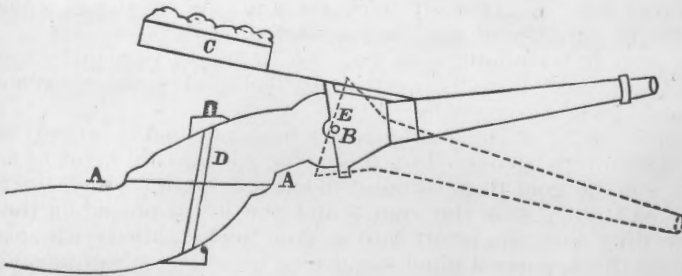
Little Giant, section. A, joint for horizontal motion; B, ditto for depression or elevation; C, balance-box to keep pipe in place; D, E, bolts. (See p. 418.)
